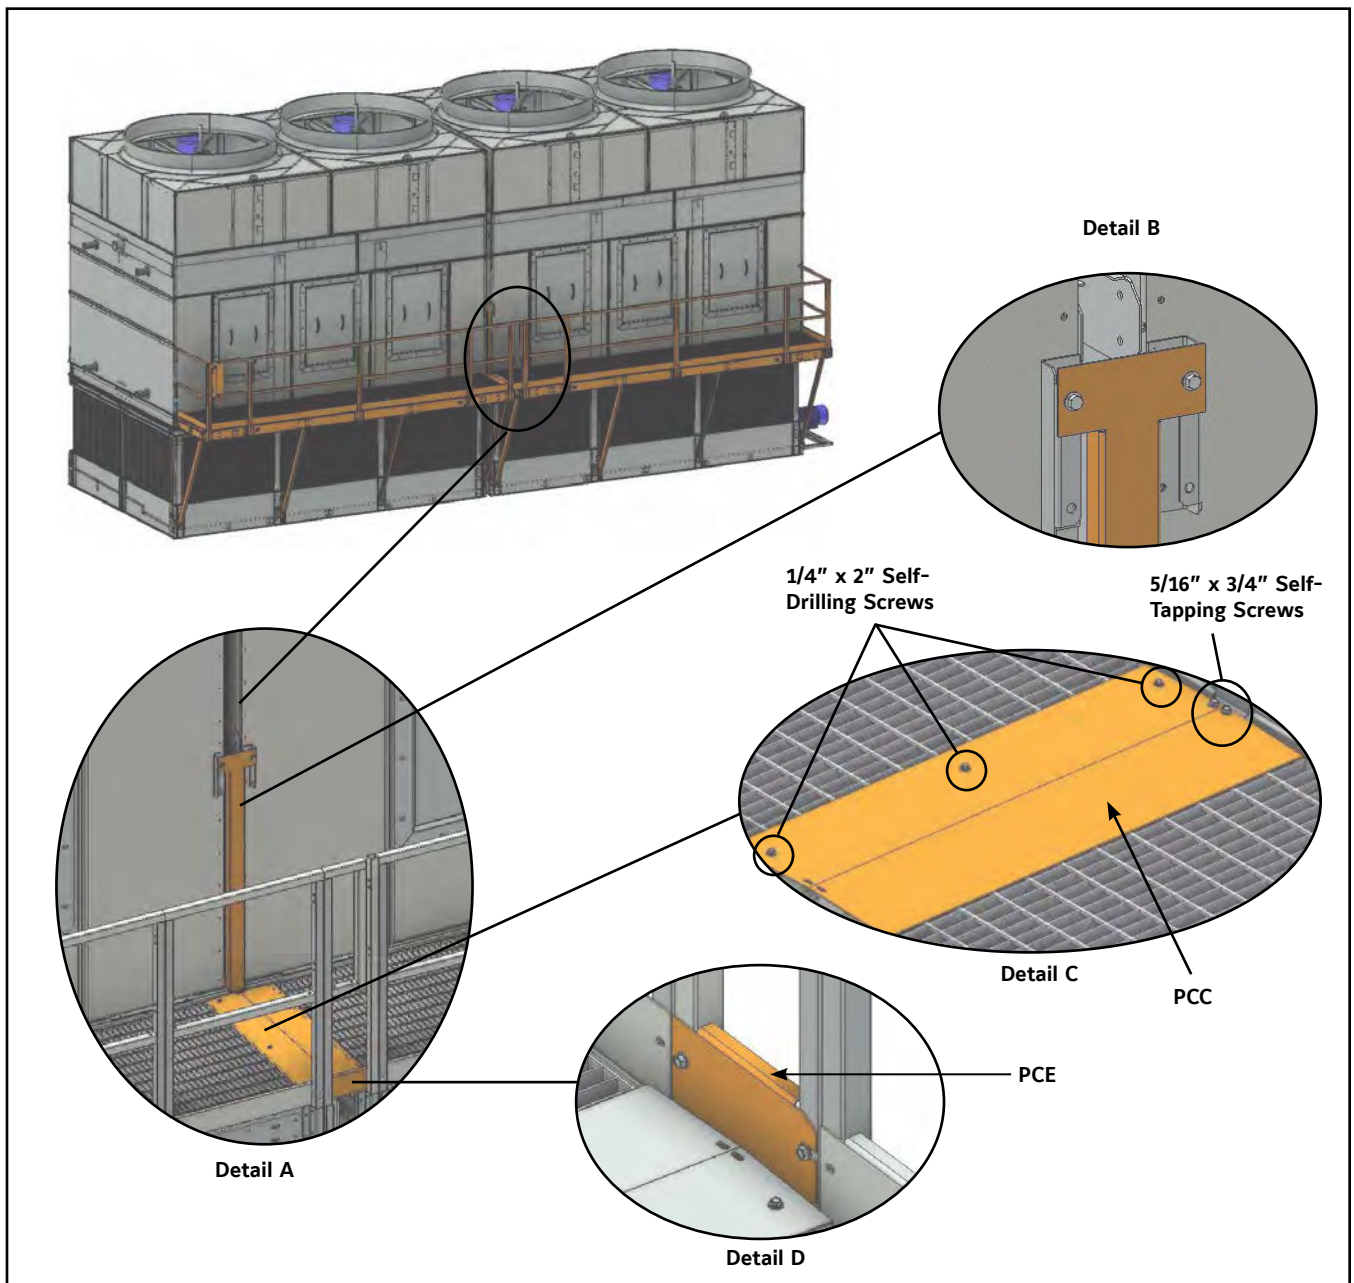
Fill Access Platform – IDC3-1236, 2436, 1240, 2440
